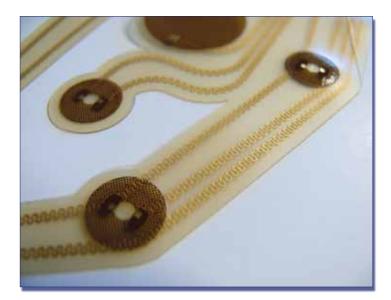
Example of Polyurethane Printed Circuit Board with Meandering Shape of Conductors
